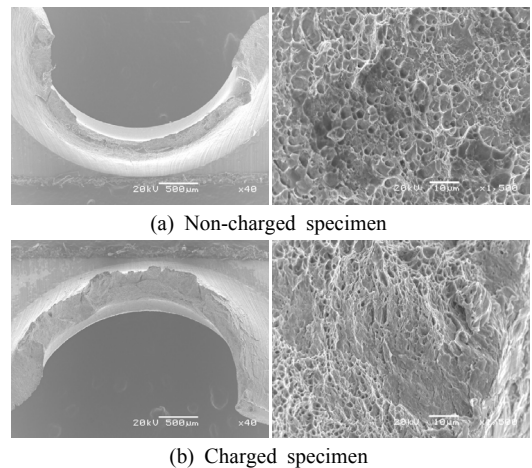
Comparison of fractured surfaces between non-charged and charged specimens for weld metal.
